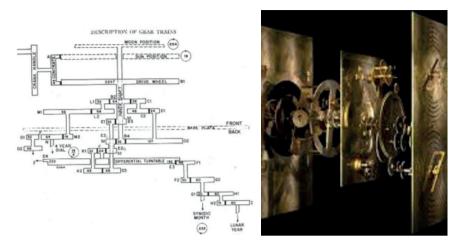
An example of mechanism design used in study of history of machines. Left: a drawing model of Antikytera machine. Right: a reconstruction via a prototype.
